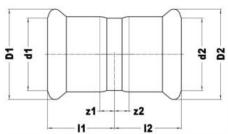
Dimensions (Example DN20) d1 = 22 mm; D1 = 32 mm l1, l2 = 26 mm; z1, z2 = 7 mm
